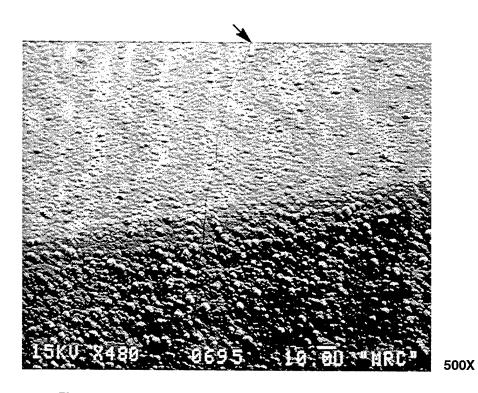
SEM Photo of Raceway, 90°. Note crack.
